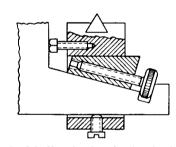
A knife-edge bearing is raised or lowered by a screw-driven wedge. Two additional screws position the knife edge laterally and lock it.
